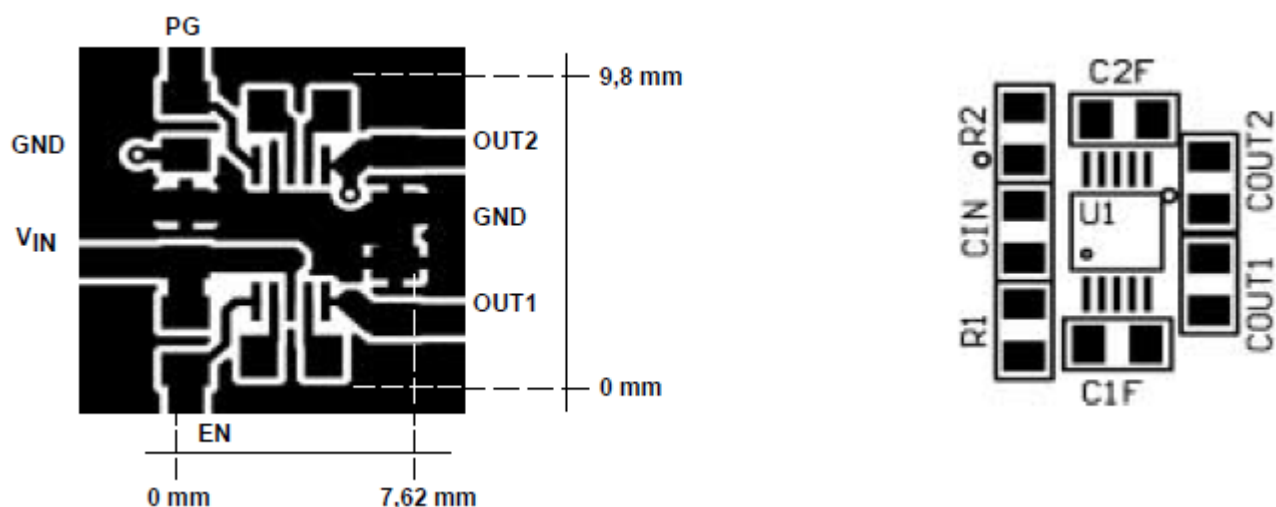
Recommended PCB Layout for TPS6030x (Top Layer)
